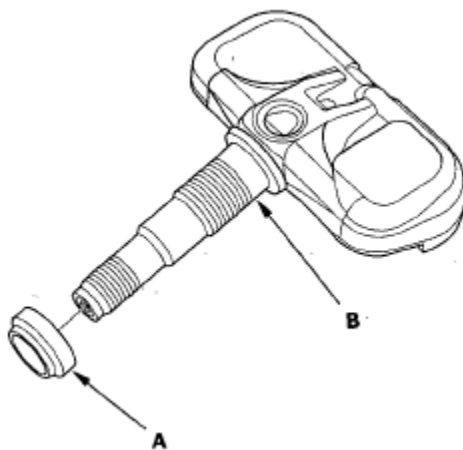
Identifying Valve Stem Grommet And Tire Pressure Sensor
